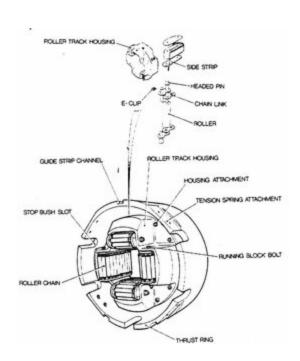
Mk XVIIT hose-drum-unit ejector assembly
